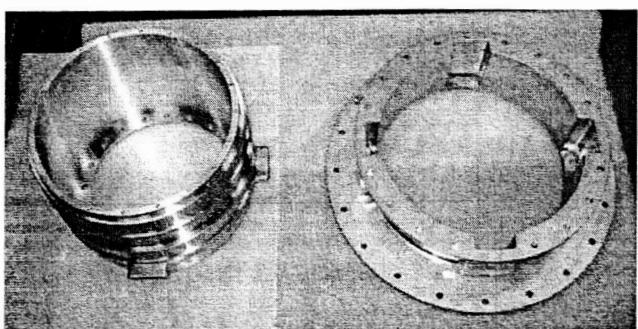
The Rear Piston Skirt and Rear Piston Guide Cylinder
